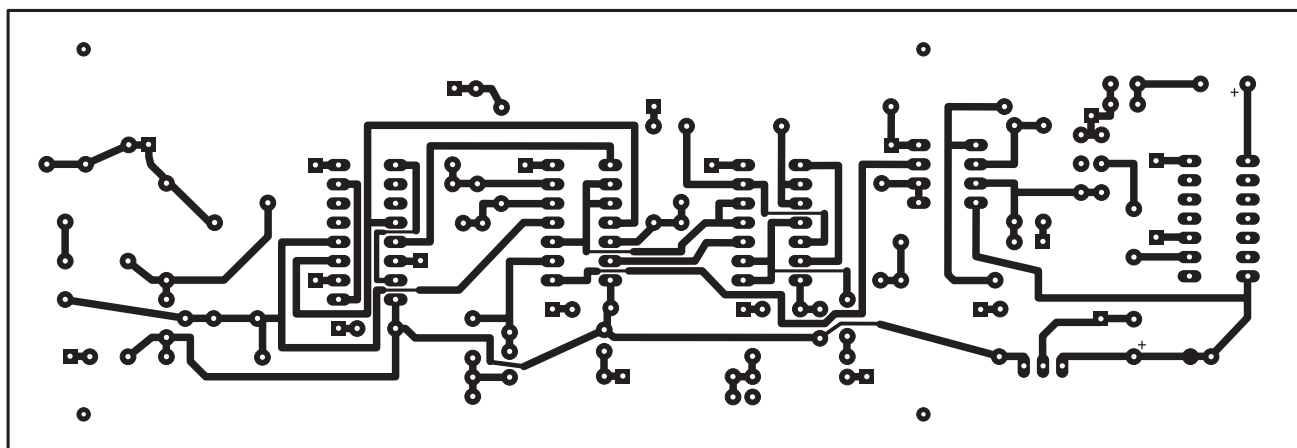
PCB layout for the receiver calibrator and transmitter monitor
